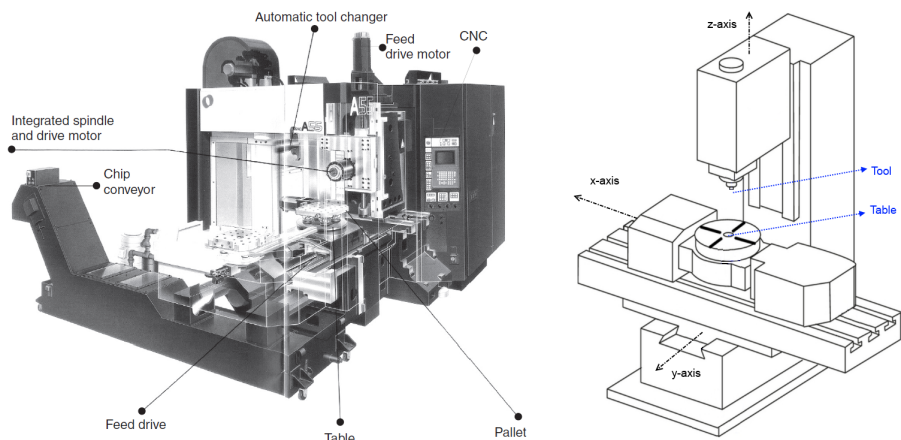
(Left): Interior of a machining cabinet with operating panel. (Right): Machine tool with three linear axes. Sources: [8, 9].
